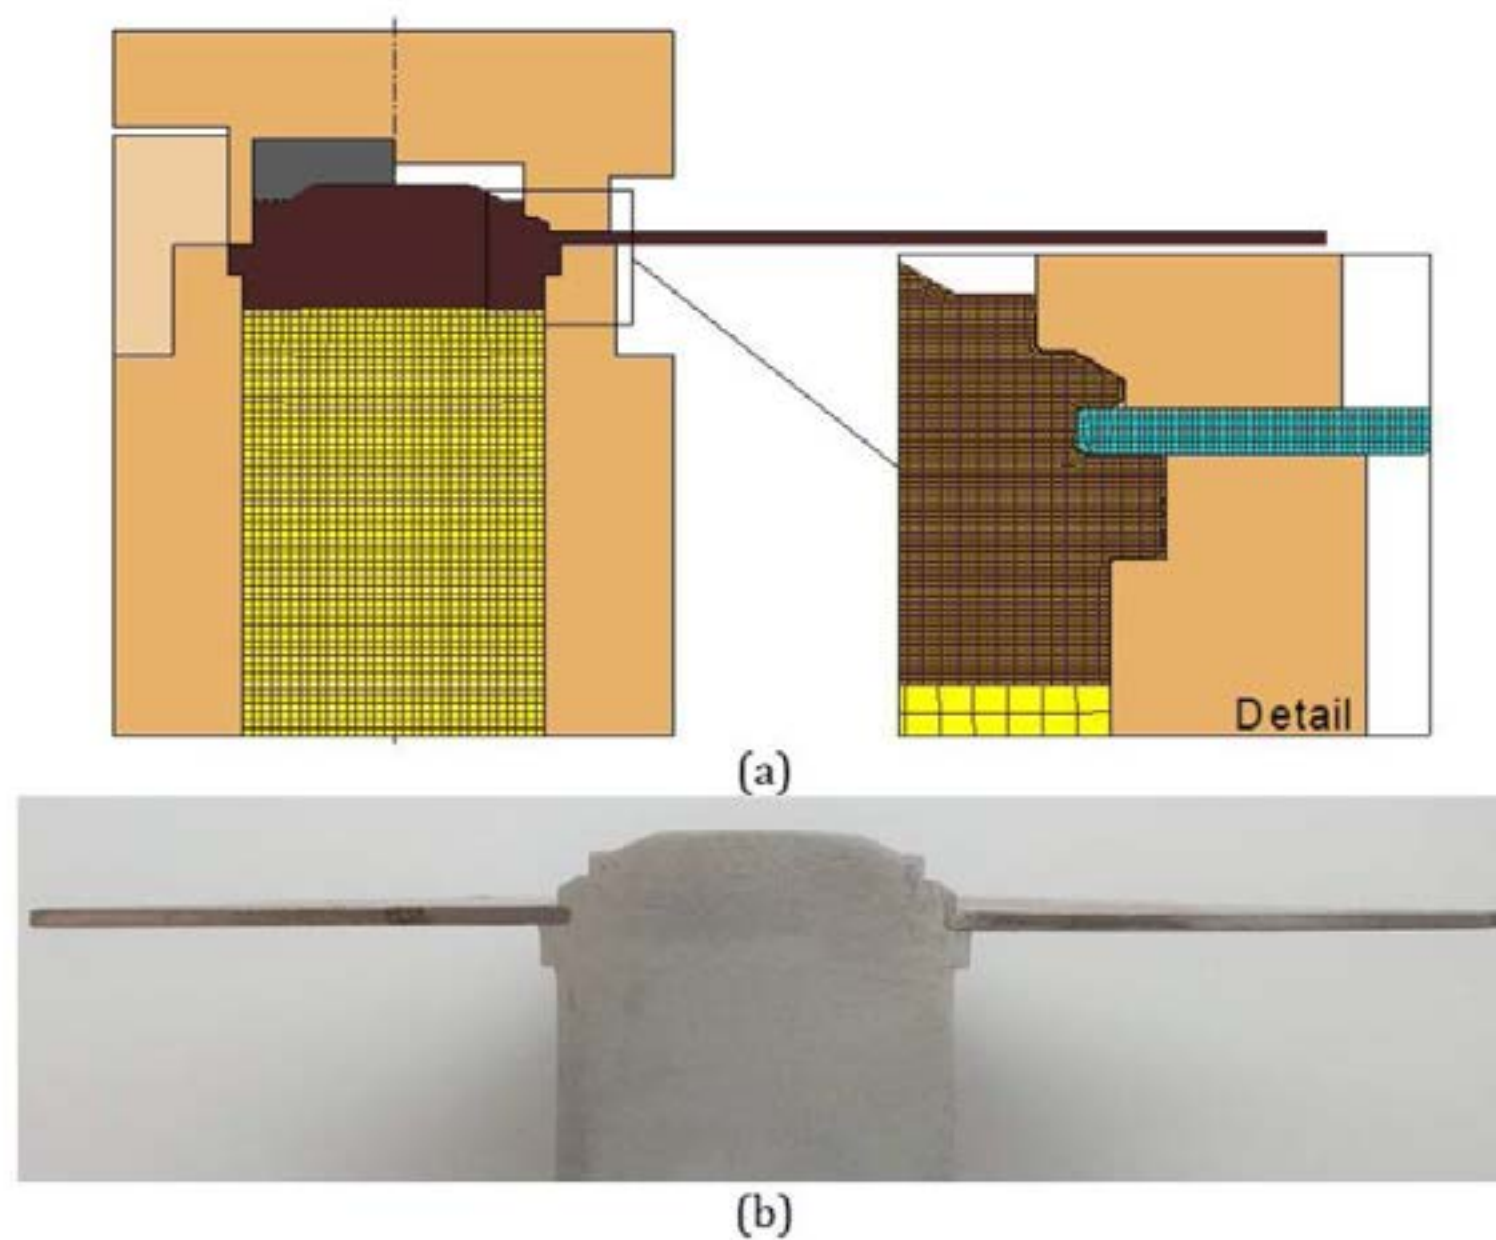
(a) Finite element modelling of the joining of DC04 steel sheets to AW 6082 aluminum rods by the new proposed boss forming process. (b) Photograph showing the cross section of the actual joint.
